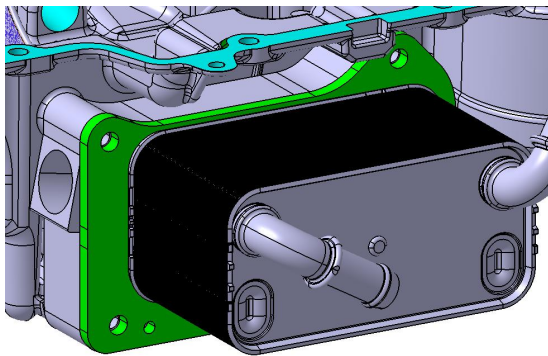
3D-model of the adapter plate with oil cooler.
